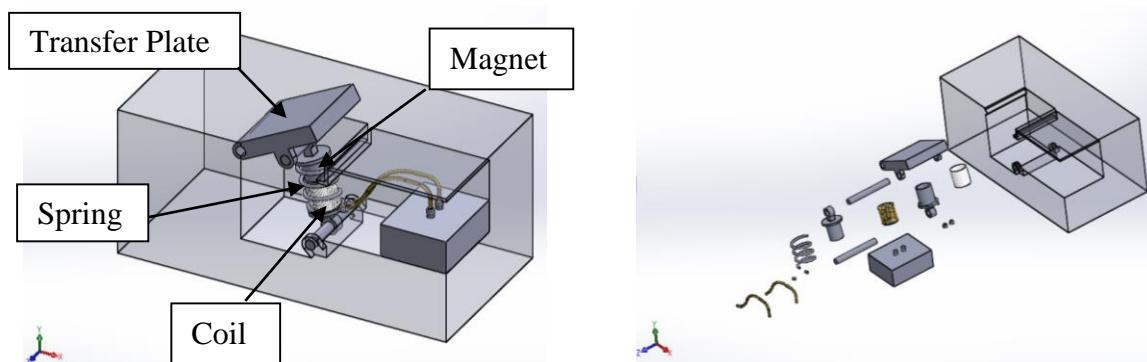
Prototype 1_Configuration (Left) & Exploded View (Right)
